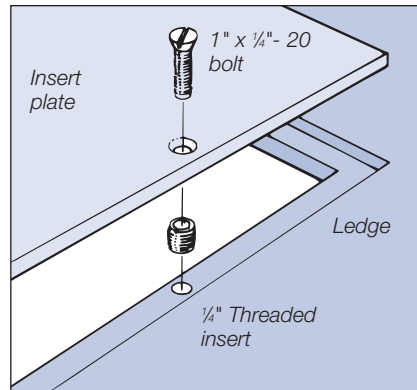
Use 1/4"-20 threaded inserts and 1"-long bolts to hold the interchangeable insert plates in place.
